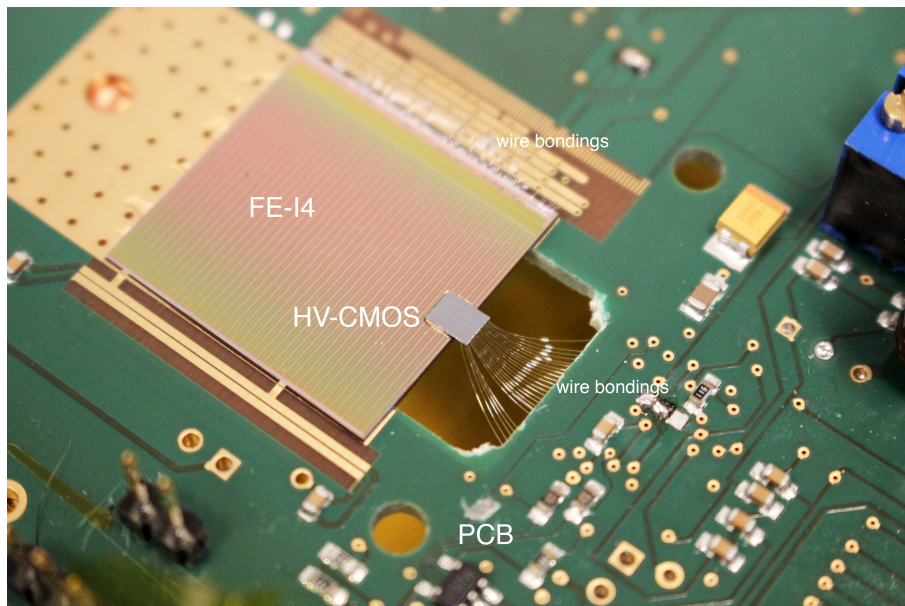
Assembly photograph. Both HV-CMOS and FE-I4 are wire bonded to the PCB. To give a scale reference, the FE-I4 is approximately 2 cm wide.
